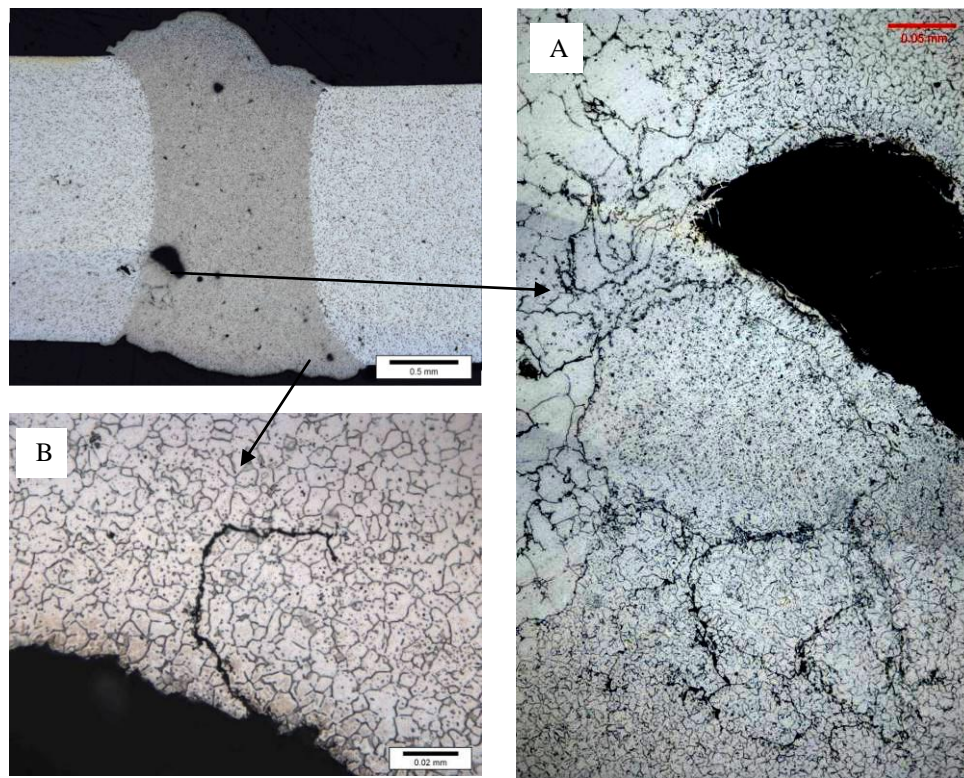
Solidification Cracks in The Sample Welded at 0.2 mm gap – Middle Section
